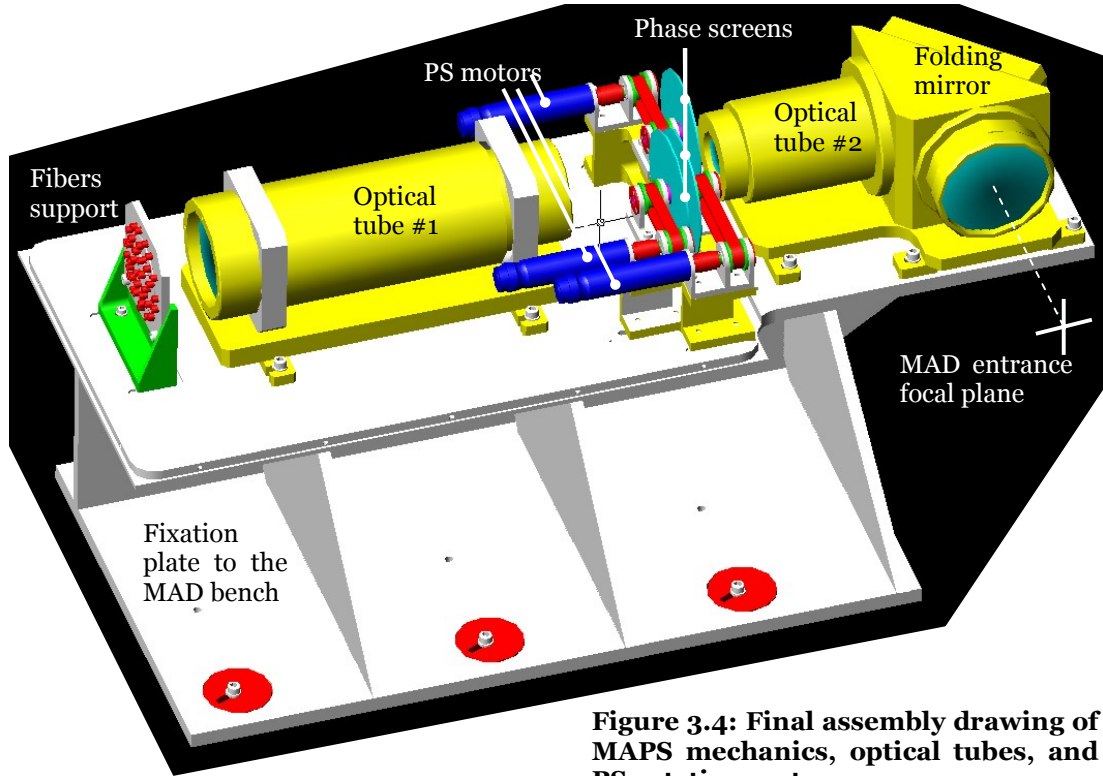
Final assembly drawing of MAPS mechanics, optical tubes, and PS rotation system.
